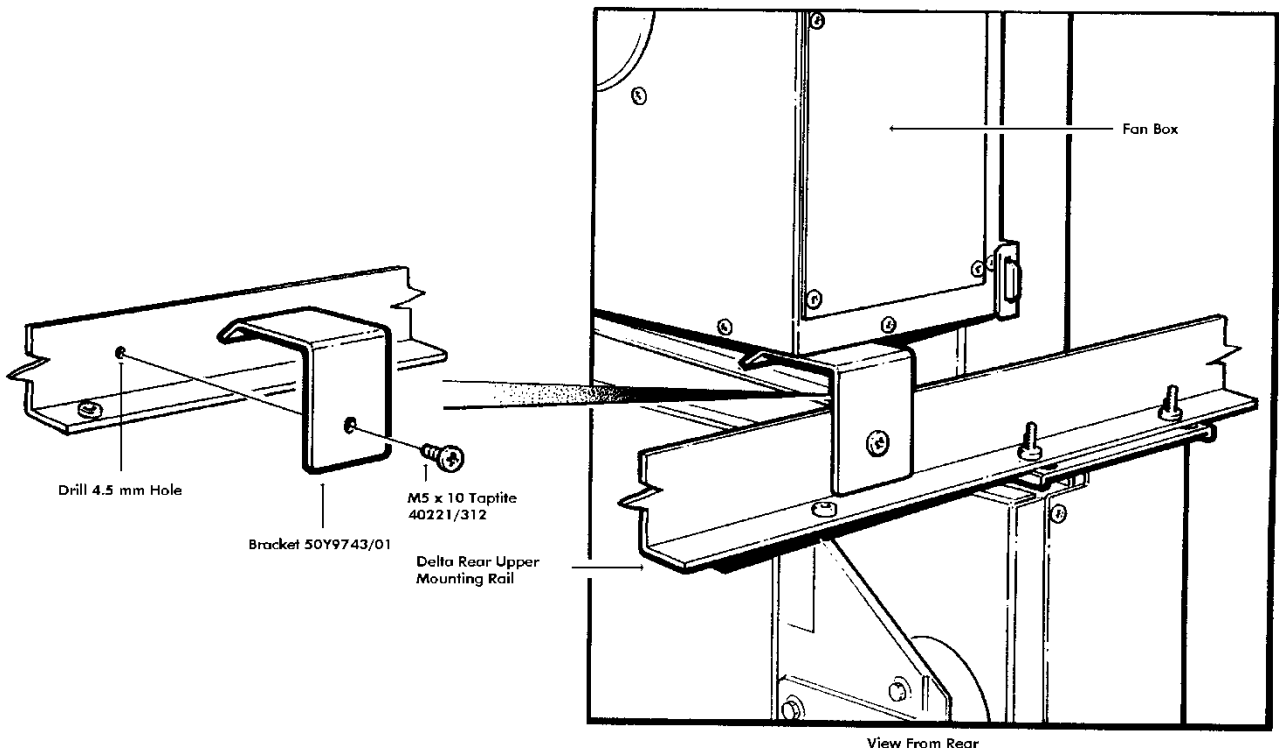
Fitting of fan support bracket (50Y9743/01)
